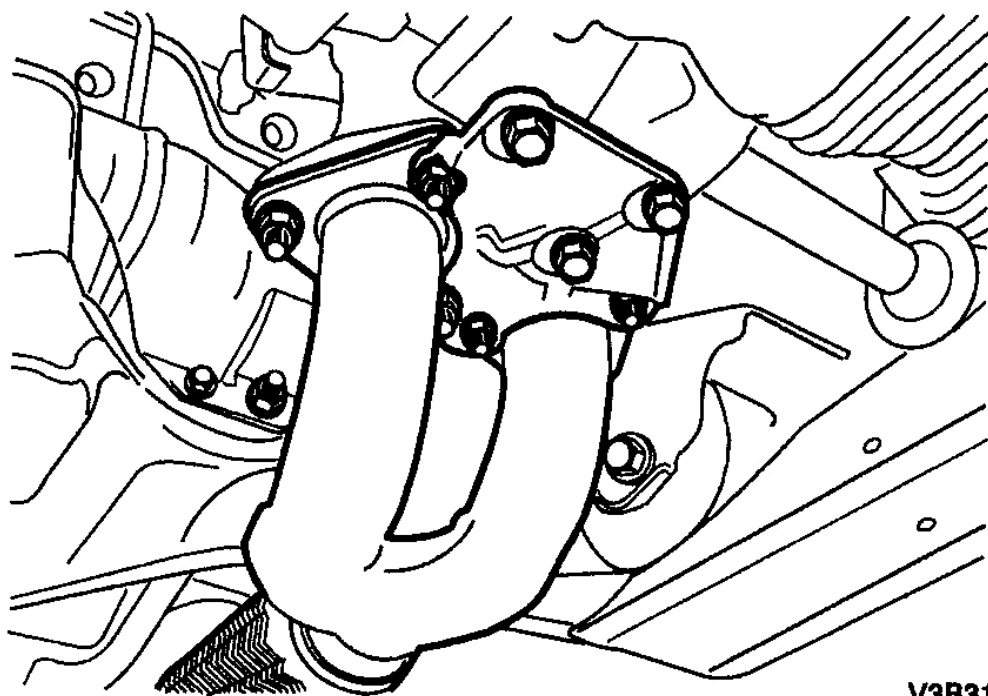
Tightening Front And Rear Engine Mount Bracket-To-Damper Bush Bolt/Nut
